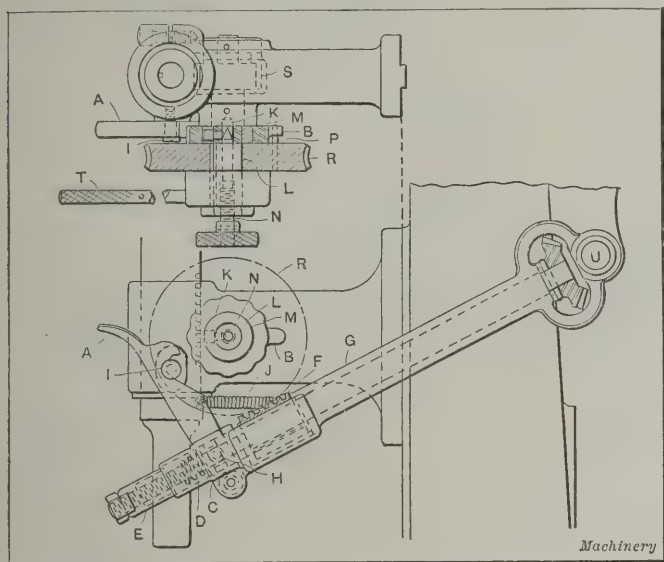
Feed Mechanism of Machine illustrated in Fig. 4
